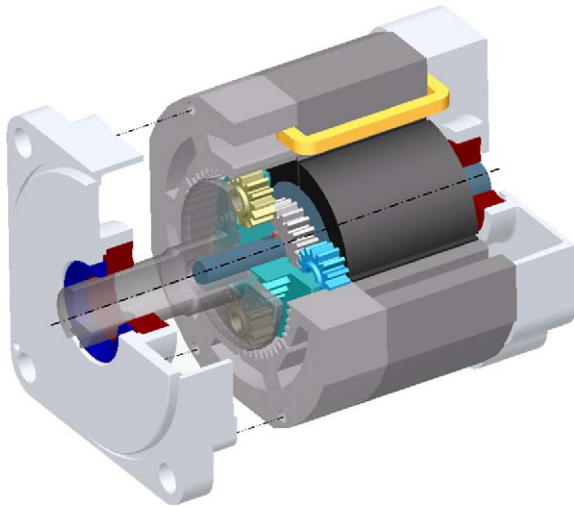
Configuration of the proposed BLDC motor integrated with a planetary gear train.
